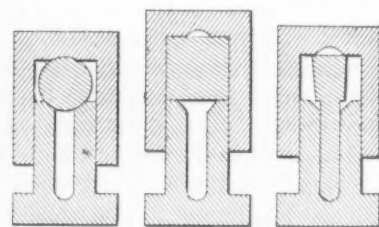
Cross Sections of the Holder with Tools of Various Section.
